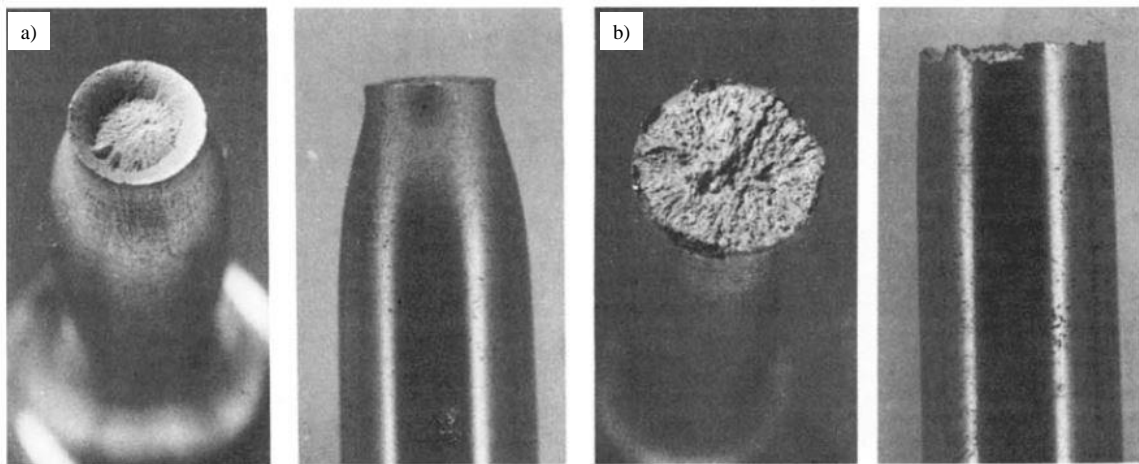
Images of (a) ductile and (b) brittle tensile fractures [43].
